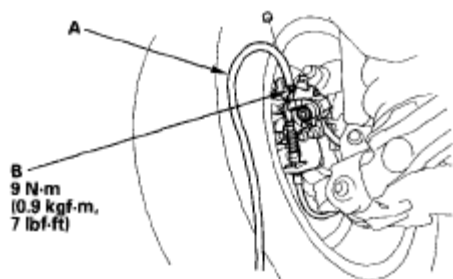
Attaching Clear Drain Tube To Bleed Screw (Rear-Disc Type) (With Specifications)
